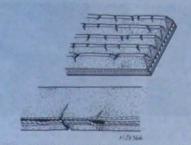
Checking for power steering drivebelt wear — multi-ribbed type shown as fitted to later models (Sec 9)
